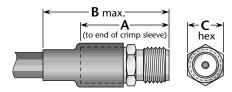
(Crimp type, shown with supplied heat-shrink tubing)
